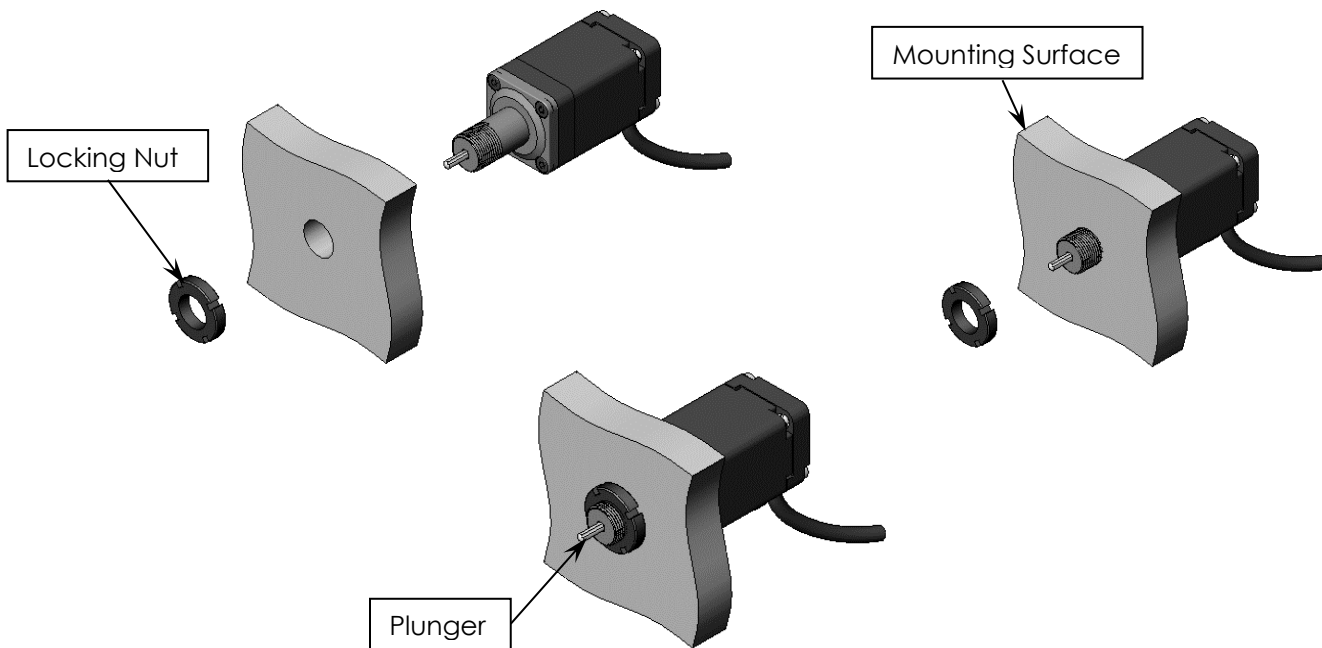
A. MP-21 12 mm & 25 mm General Installation
